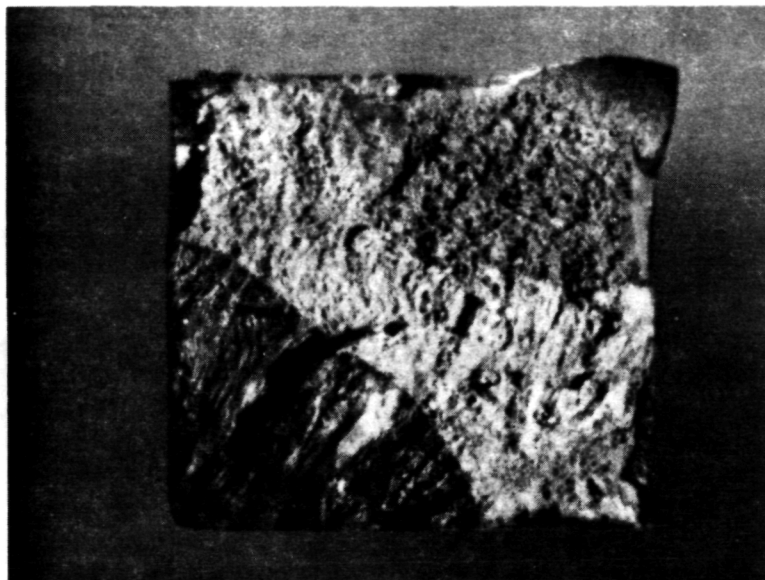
The exposed surface of a heat check found in the marage II welded corner. The darkened areas is the crack and the light area is the H-13 die steel (Mag. 8X).
